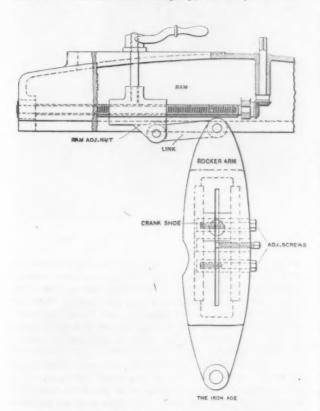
Detail of the Ram Reciprocating Mechanism.
